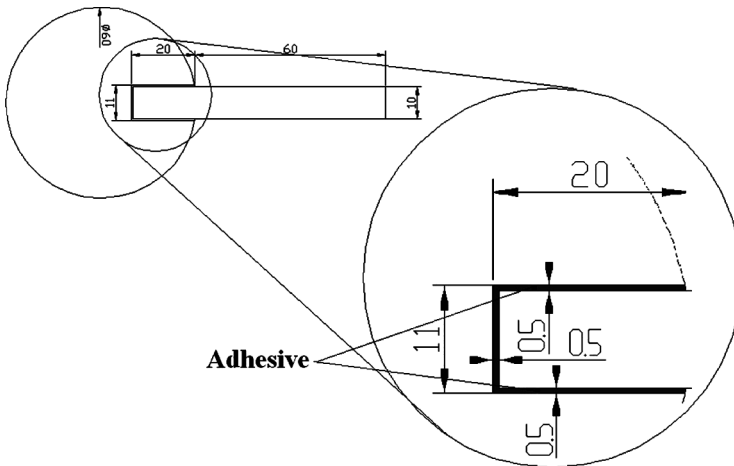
Bonded specimen geometry, adhesive thickness (dim in mm).
